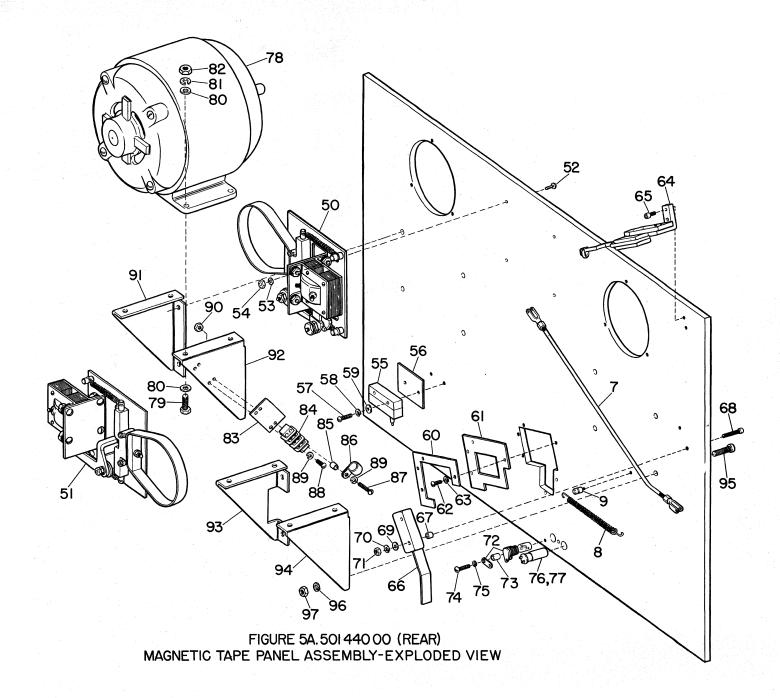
A MAGNETIC TAPE PANEL ASSEMBLY - UNISERVO I (CONT.)
